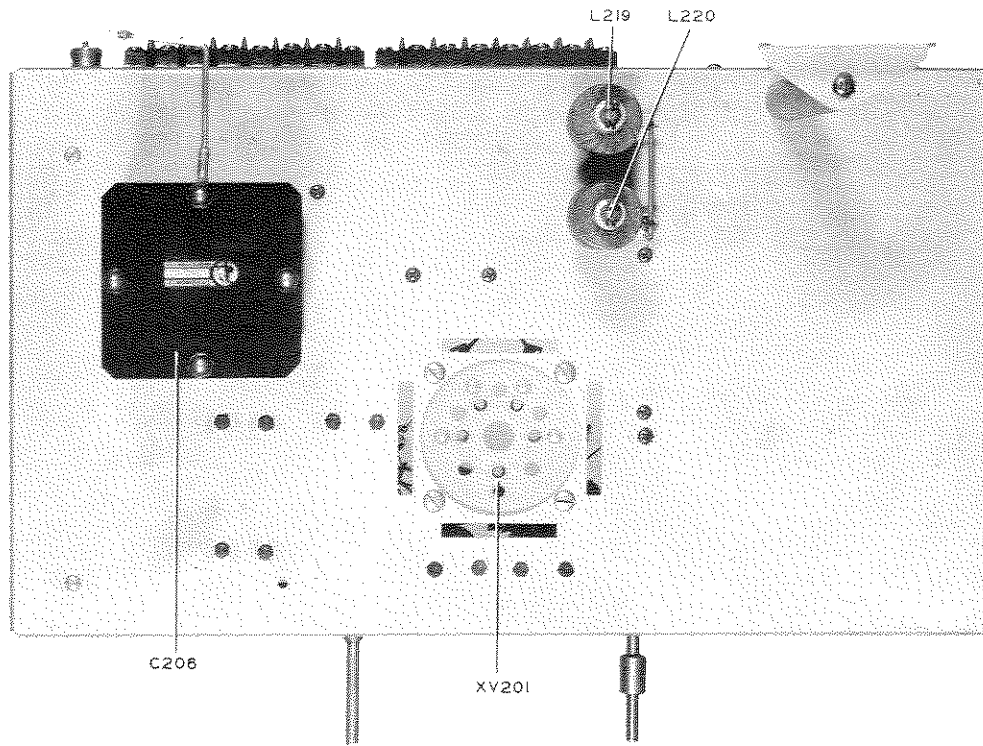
POWER AMPLIFIER TUBE CHASSIS, TOP VIEW
